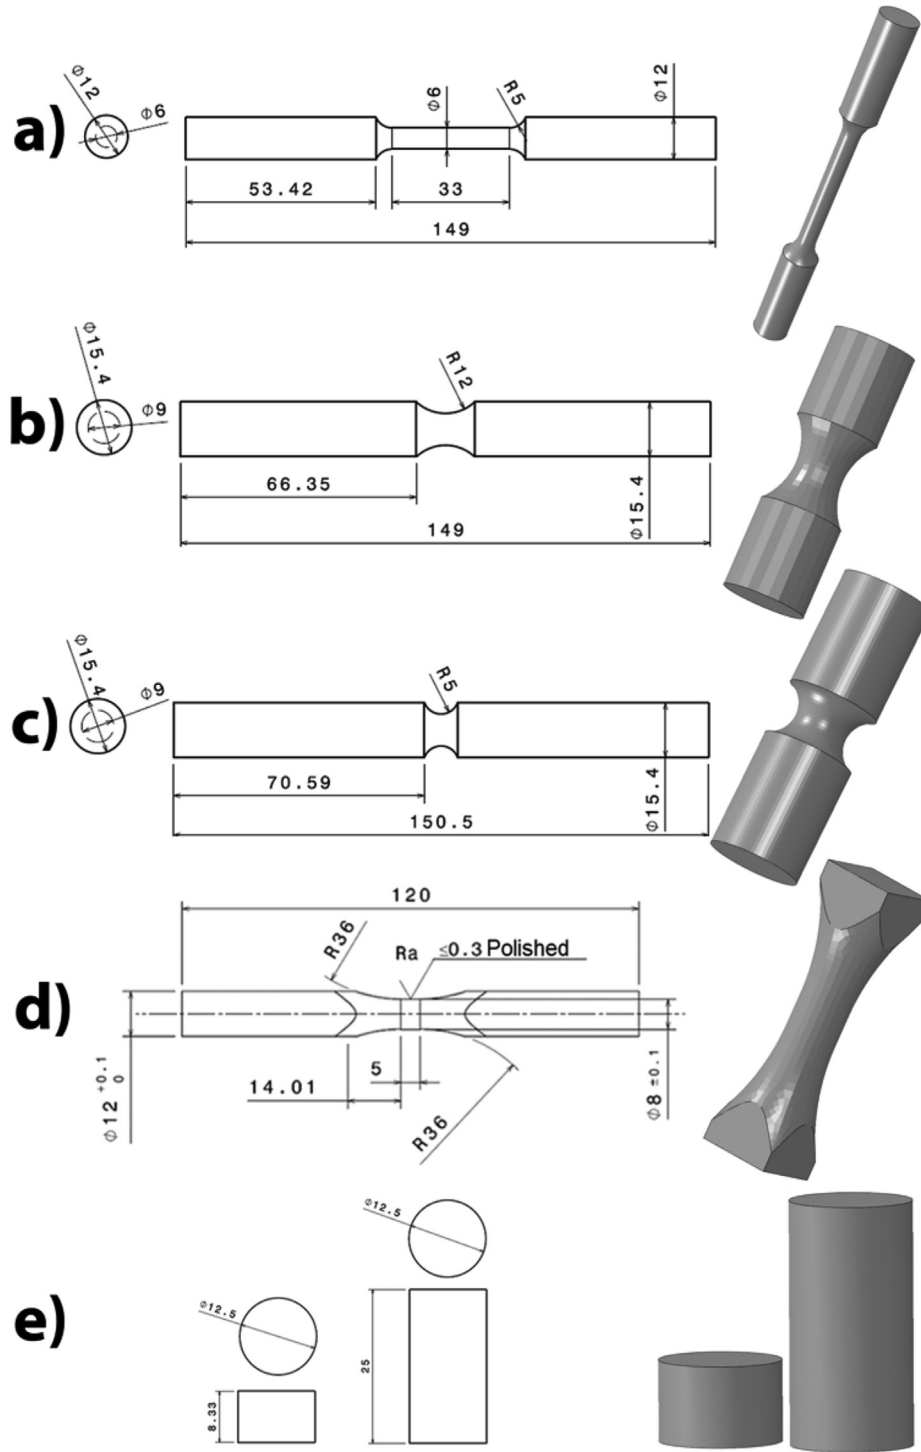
a) Round smooth specimen, b) Round notched specimen (Notch radius 12 mm), c) Round notched specimen (Notch radius 5 mm), d) Pure torsion and multiaxial specimen, e) Upsetting specimens.
